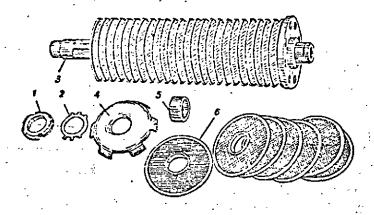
HYDRO-MECHANICAL TRANSMISSION TANK FILTER PARTS
